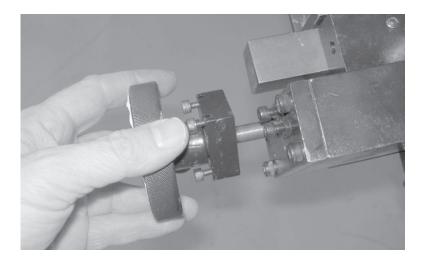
With the end block loose, turn the feed knob counter-clockwise to remove the feed screw.
